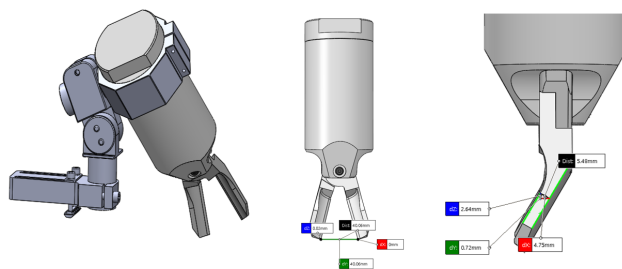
Nipper assembly and dimensions, Nipper Body Part# SPT-50R, Blade Part# GSN-N30-AA (*Emicorp.com. EOAT Parts — EMI, n.d.*).
